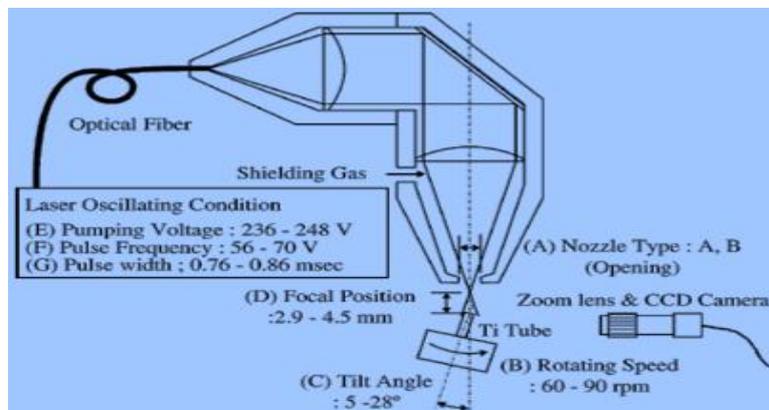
Optical arrangement of the Nd: YAG laser welding system and optimized welding parameters for welding of titanium tube (Hyoung Keon Lee).
